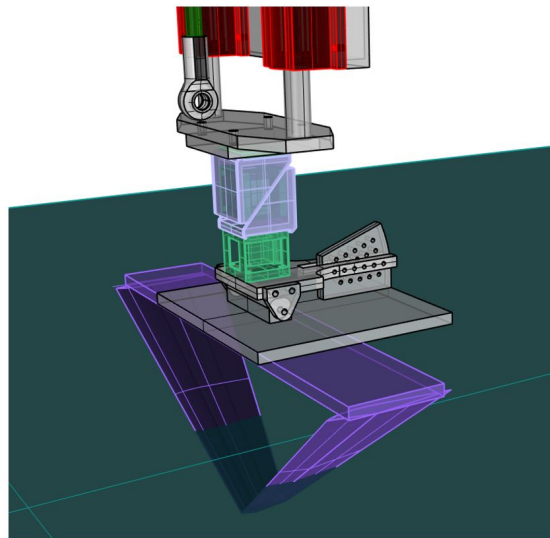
Basic configuration of the mounting mechanism used in tow tank testing.
